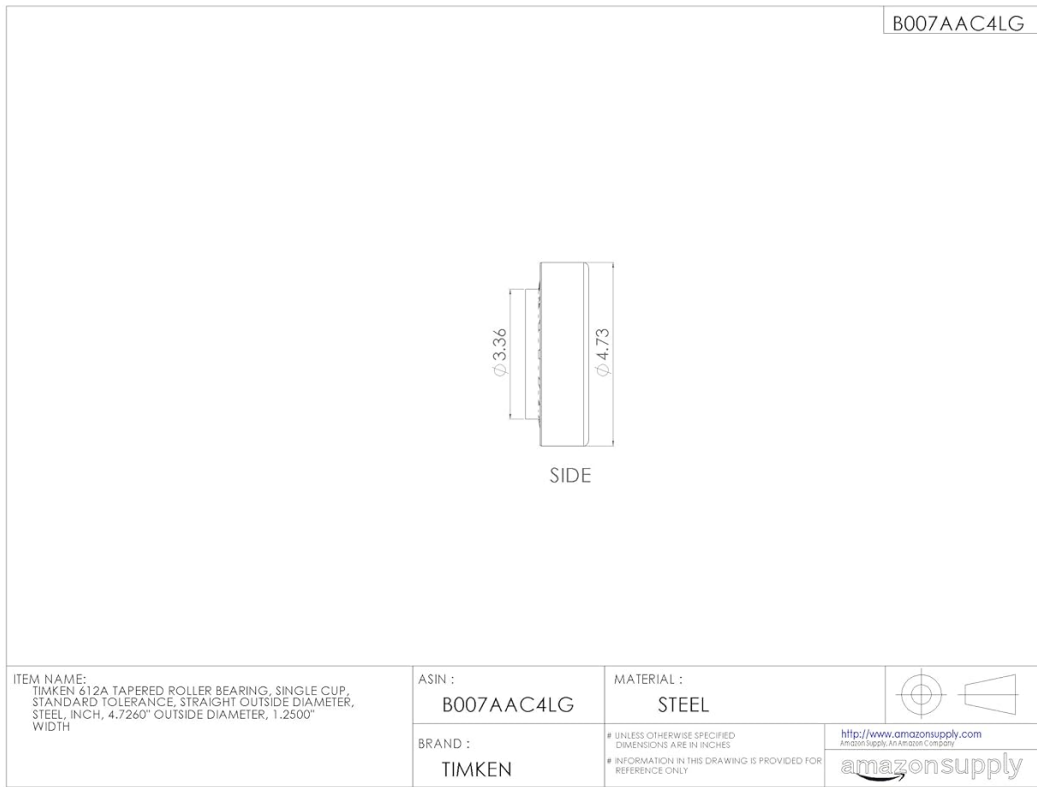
Side View Technical Drawing. Shows the bearing's profile and height dimensions.
